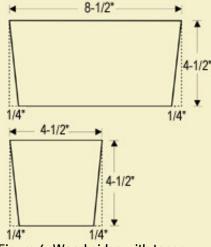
Wood sides with taper trimmed 1/4" from each end.
